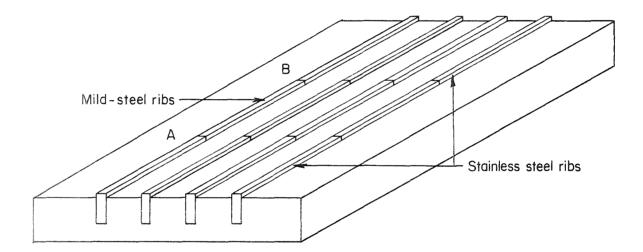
RIB-TOOLING ASSEMBLY USED IN STOP-START RIB-WELDING EXPERIMENTS
